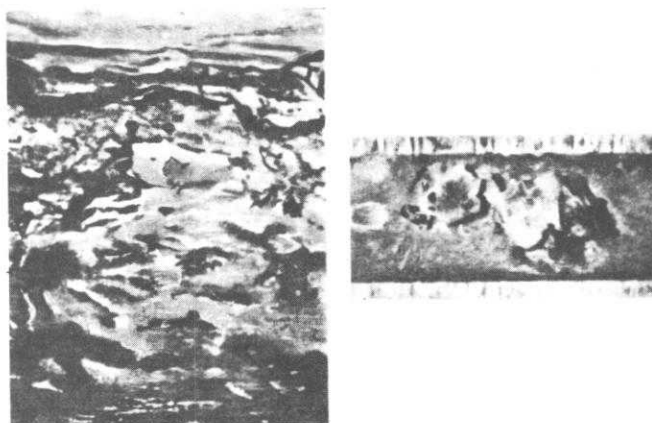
Presence of scab pitting on the water side of boiler tube surfaces
